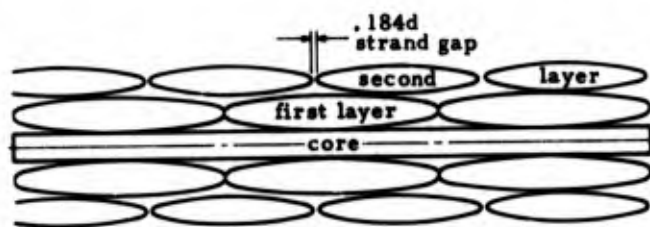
Longitudinal Cross-section, 19 Strand, Lay Ratio 14.4
